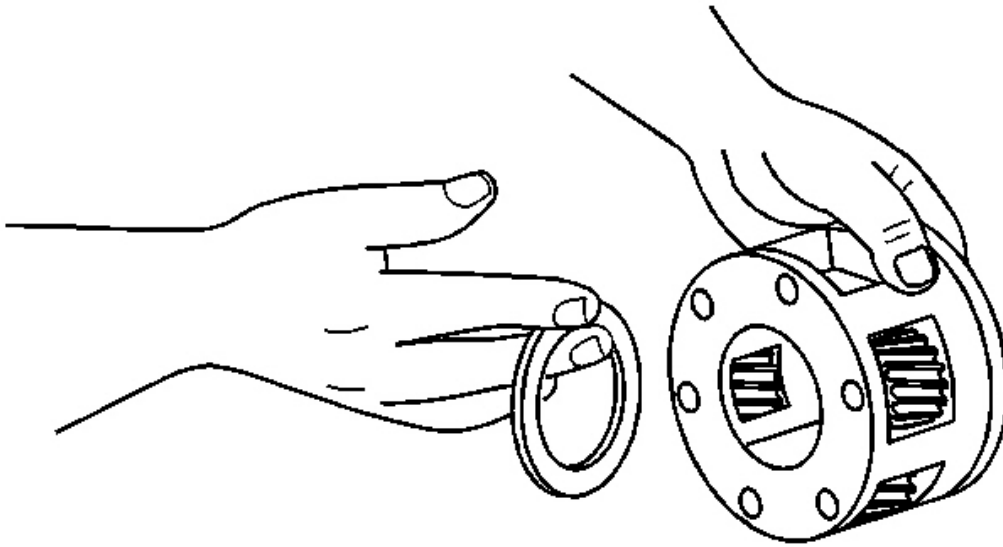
Installing The Input Gear Bearing Into The Front Case
